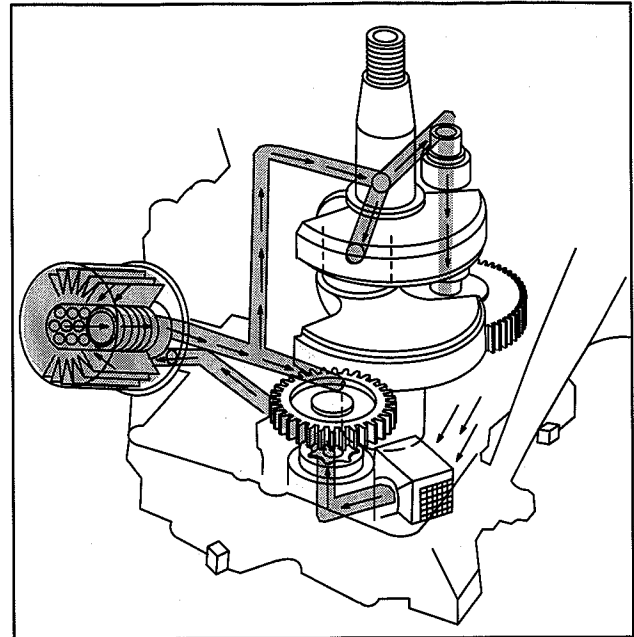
Full Pressure Lubrication System - Vertical Crankshaft
